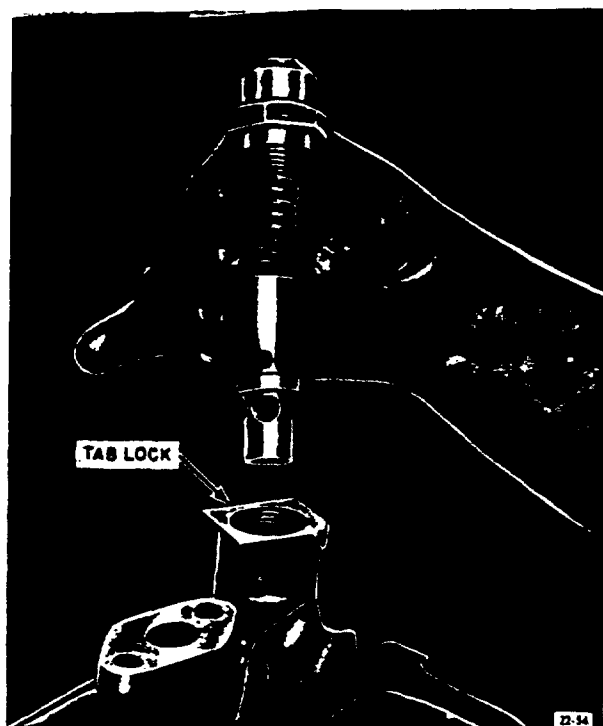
Installing Oil Pump Pressure Relief Valve Plunger
